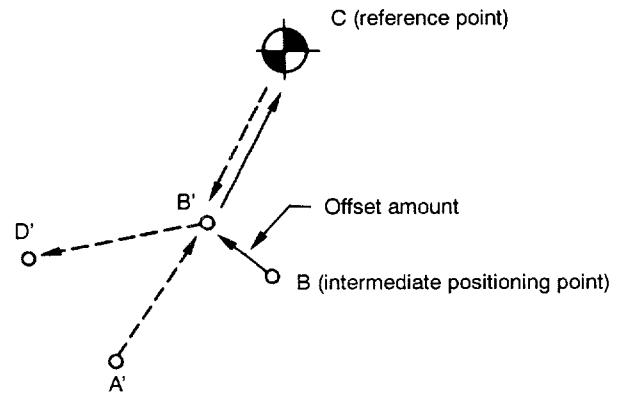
G29 Operation Executed in the Tool Position Offset Mode
